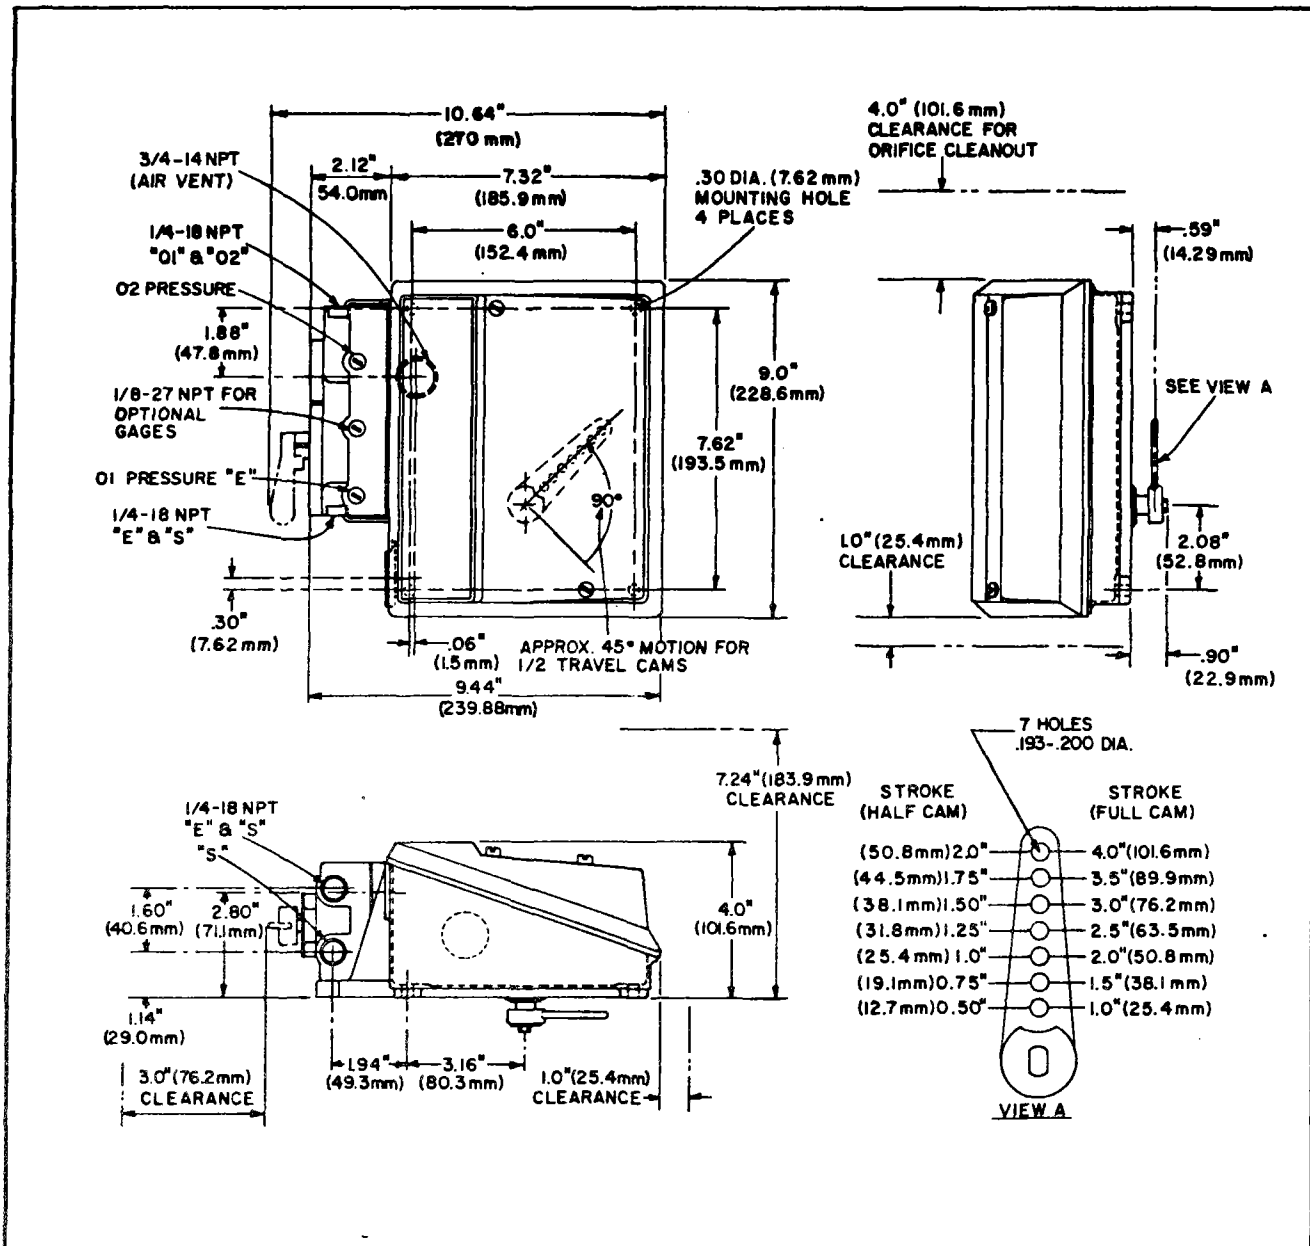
Mounting and External Dimensions of Type AP2 Characterizable Pneumatic Positioner
